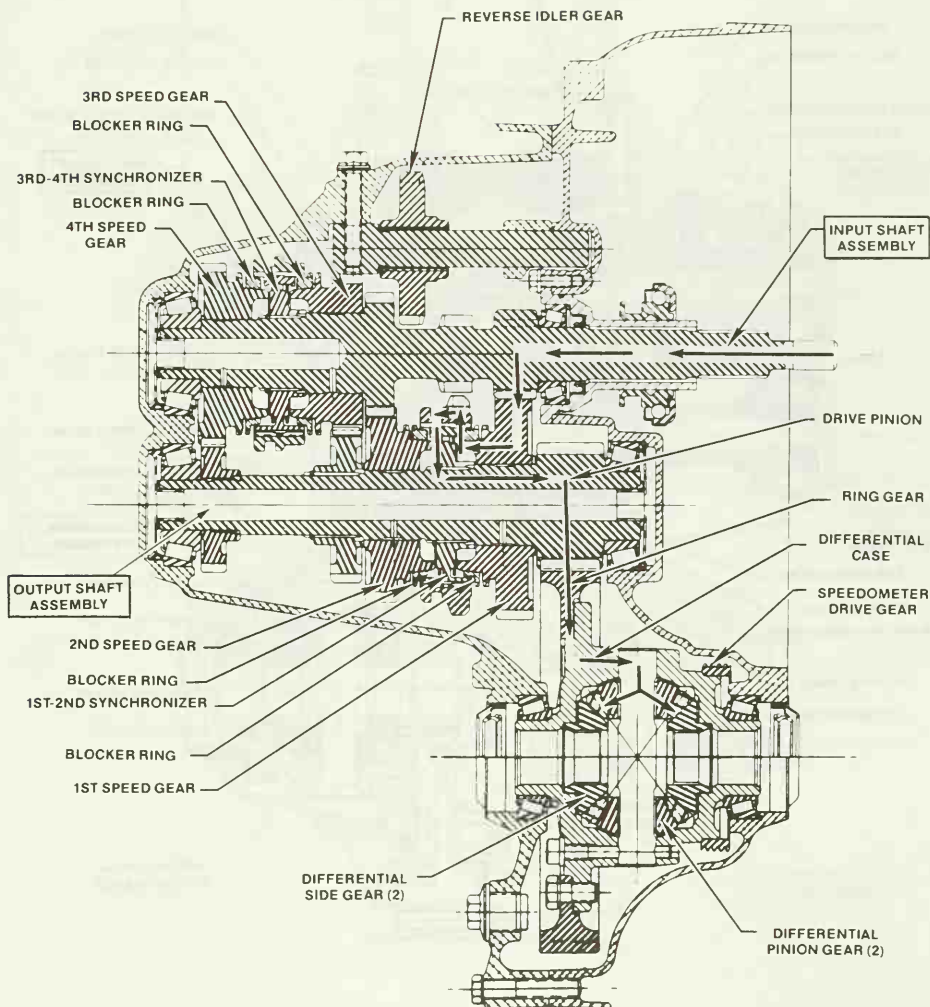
Transaxle operation in first gear. (Buick Motor Division of General Motors Corporation)
